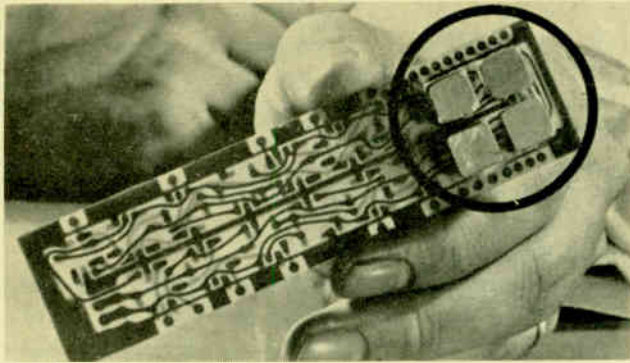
Top view of four micromodules (circled) mounted on printed circuit board (RCA). Different methods of mounting micromodules into mother boards gives a designer some control over packing densities
